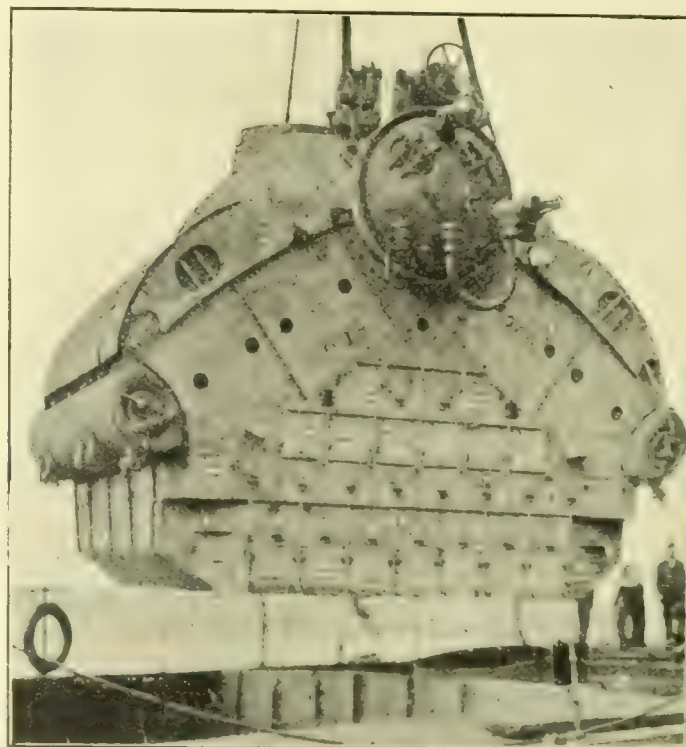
OIL-BURNING BOILER, 8,500 SQ. FT. HEATING SURFACE.
